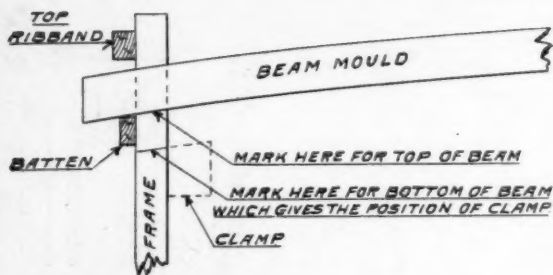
The method of locating the position for the clamp from a beam mould used as a guide
